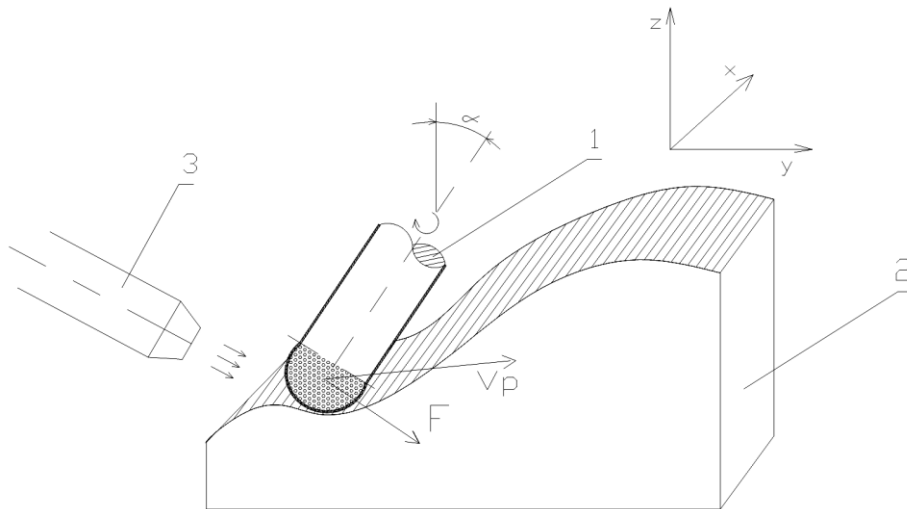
Scheme of machining (usually finishing) of curved linear surfaces: 1 – electrode tool, 2 – workpiece, 3 – Nozzle for electrolyte supplying; F – machine force, V_p – velocity of electrode (source: Grzesik, Ruszaj, 2021)
